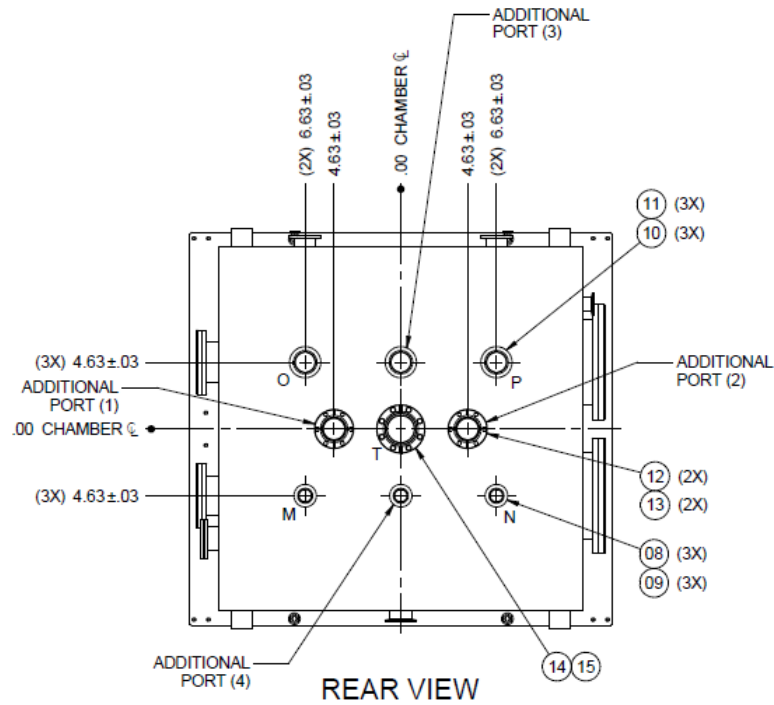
Rear view of vacuum chamber with three KF 40 flanges, three KF 25 flanges, two 2.75" CF flanges and a 3.375" CF flange. Many of these flanges will not be used as they we installed for versatility.
